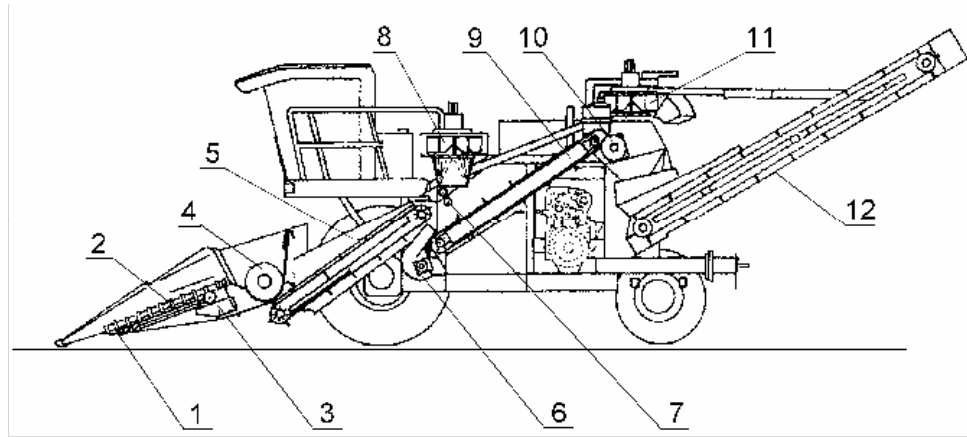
Schematic of corn cob harvesting combine: 1 – knife rollers, 2 – belt-paddle feeders, 3 – toothed gears, 4 – auger feeder, 5 – belt-slat conveyor, 6 – transverse exhauster, 7 – toothed rollers, 8 – central exhauster fan, 9 – central conveyor, 10 – server cylinder, 11 – final exhauster, 12 – unloading conveyor of cobs [40]
